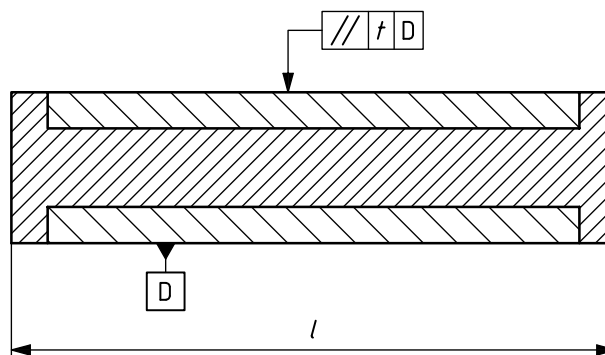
Example of a parallelism tolerance: sandwich structure
